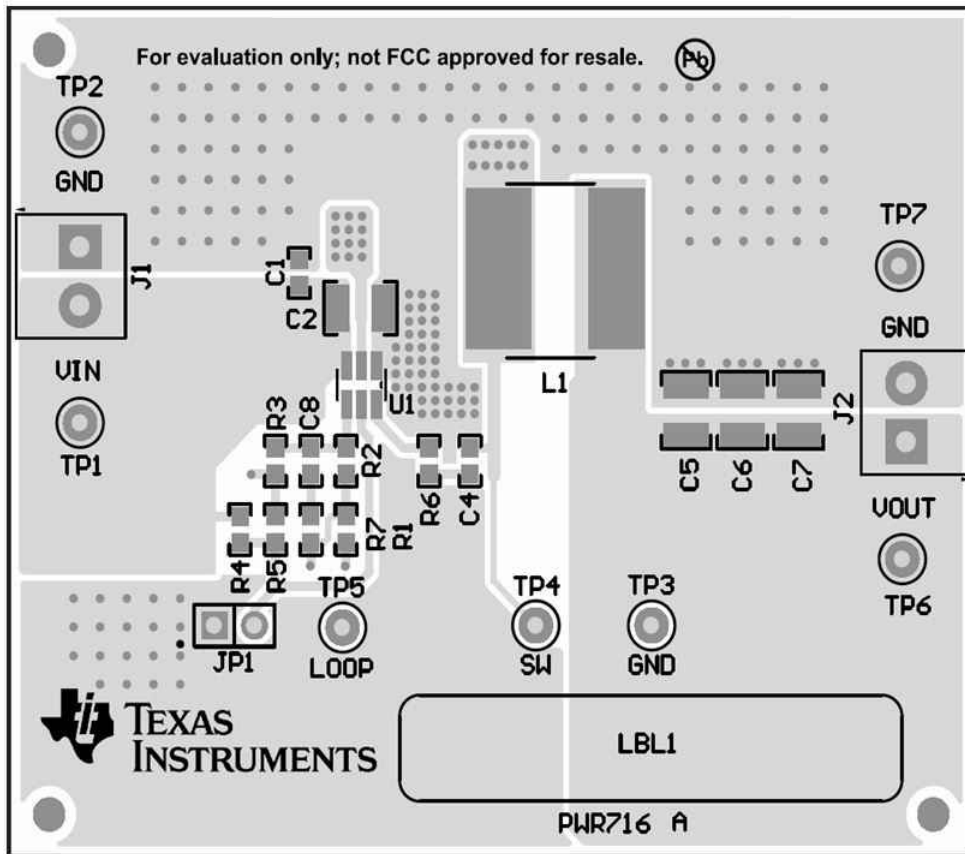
TPS54202EVM-716 Top-Side Assembly
